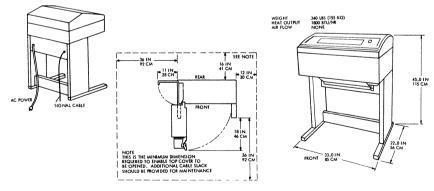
Cabling, Dimensions, Weight, Mounting Clearances, and Air Flow (Sheet 4 of 17)
